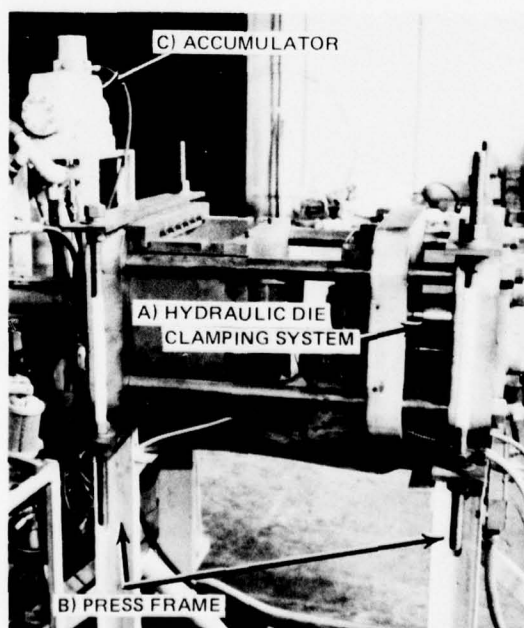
Machine Casting Unit Showing A) Hydraulic Die Clamping System, B) Press Frame and C) Accumulator
